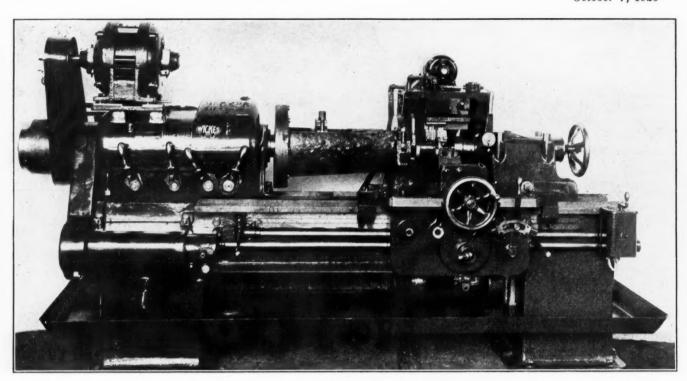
Wickes "26" semi-automatic crankshaft lathe
